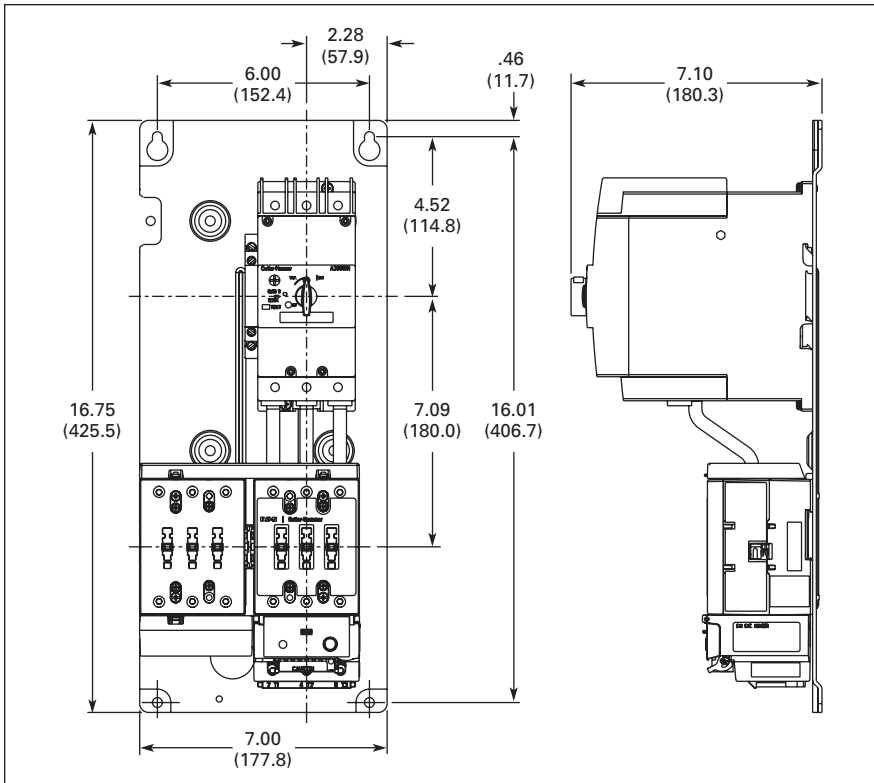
Reversing Manual and Combination Motor Controller (M)N357 (A307 MMP + N511B [Size 00/0] Contactor) — Approximate Dimensions in Inches (mm)
